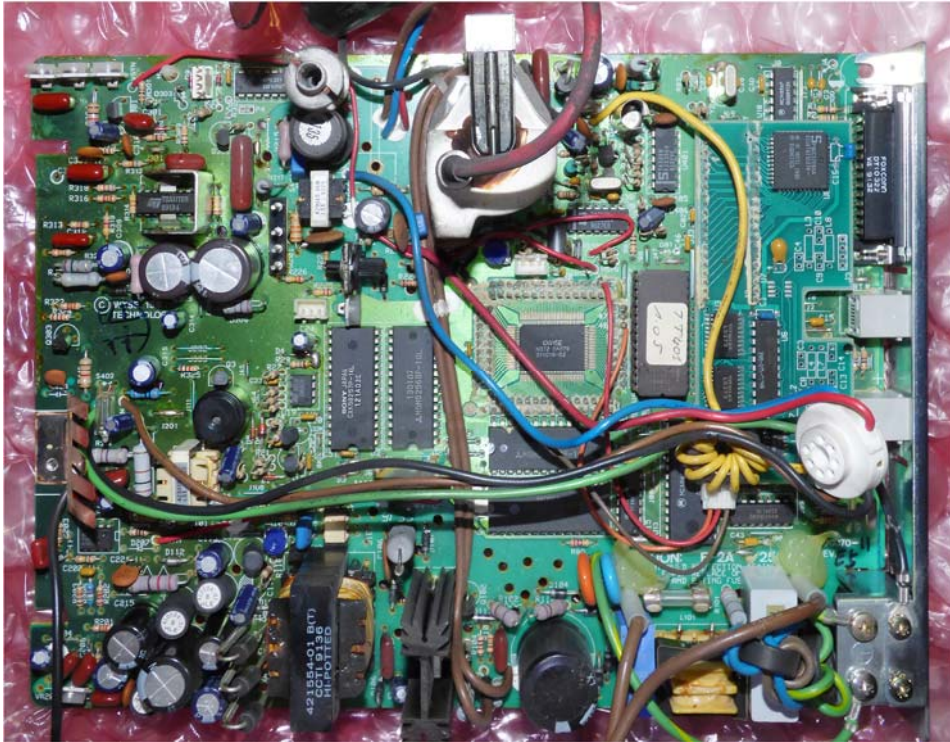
The main PCB carries an interesting piggyback PCB connected via three wires. This installation looks a bit makeshift. The vertical circuit, controlled by a TDA1107 with cooling wings is located in the upper left corner of the picture. The board has a small WYSE ASIC and another one is on the piggyback board.
